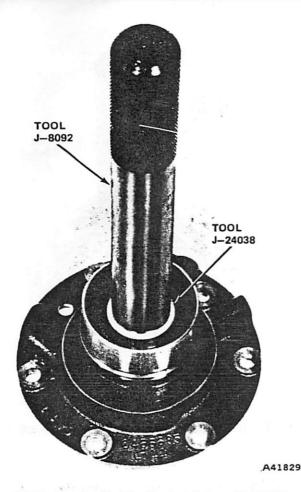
C-66 Reaction Shaft Bushing Installation—Model 727
